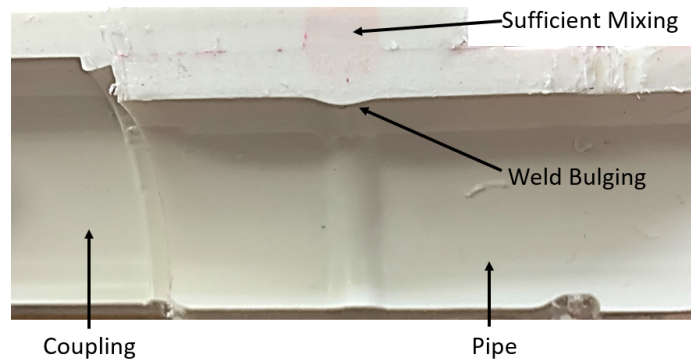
Bulging in inner pipe caused from material softening below the weld zone.
